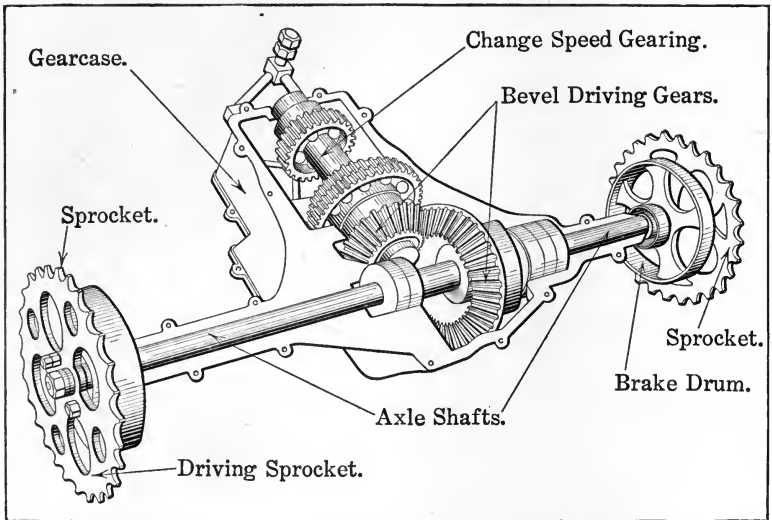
Change-Speed Gearing Combined with Countershaft for Side-Chain Drive.
